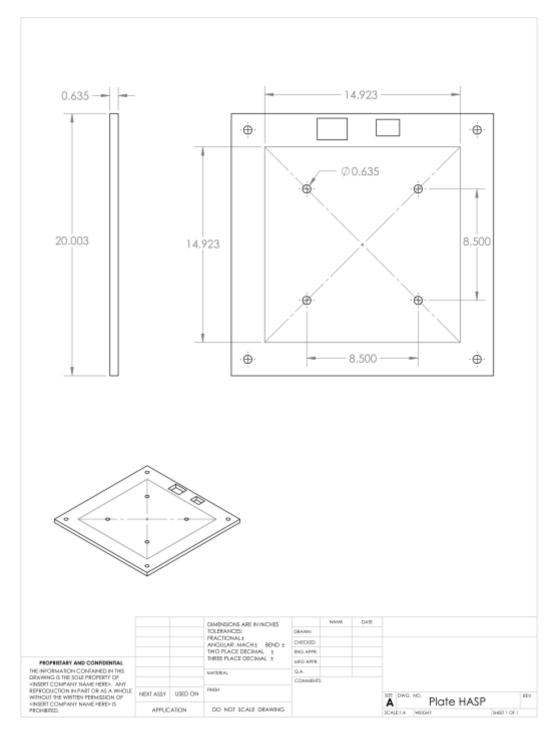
Mechanical drawing showing alterations to HASP mounting plate with dimensions in centimeters.
